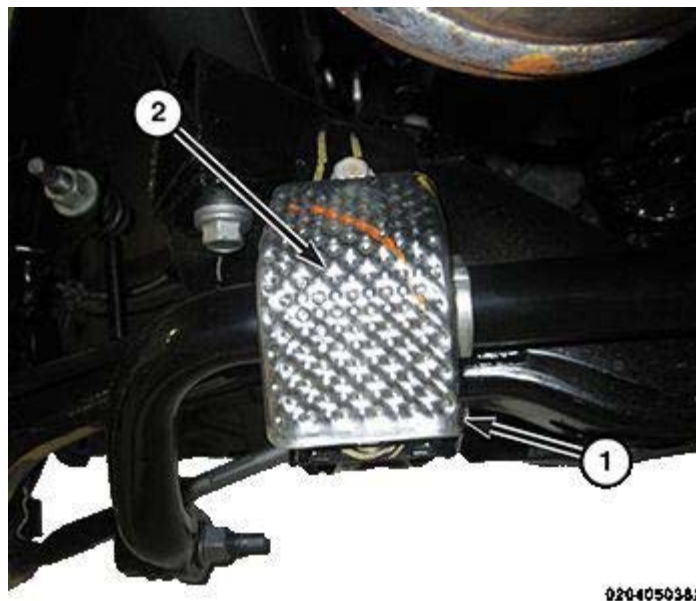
Stabilizer Bar Heat Shield & Bolt
